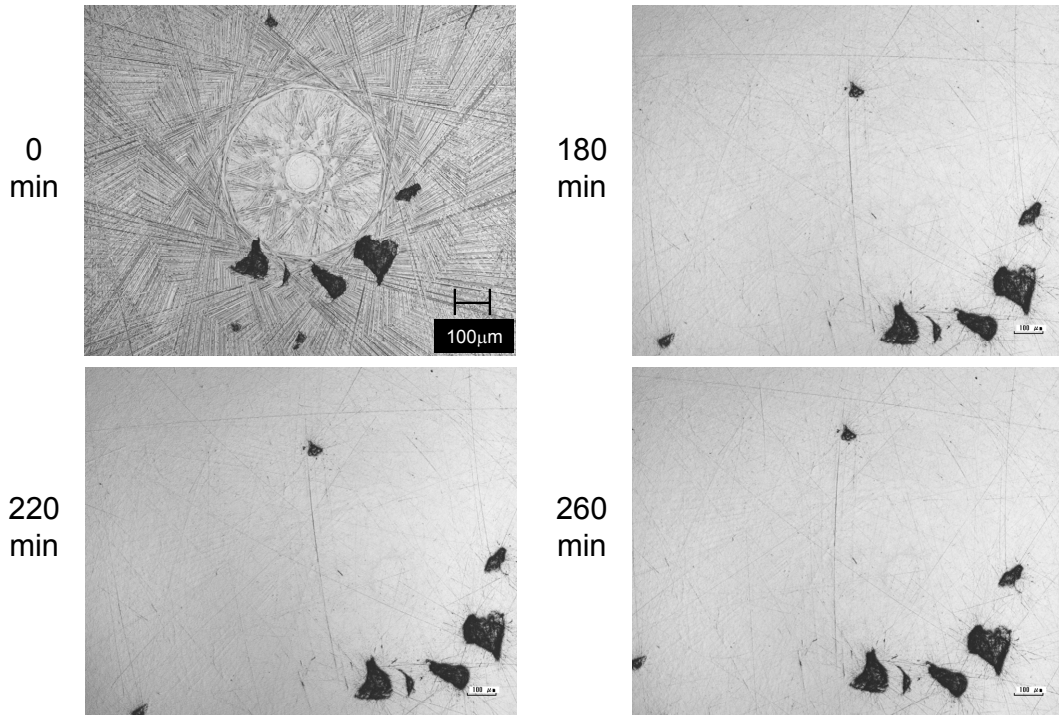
Surface of workpiece at the center part ( # 600 )
